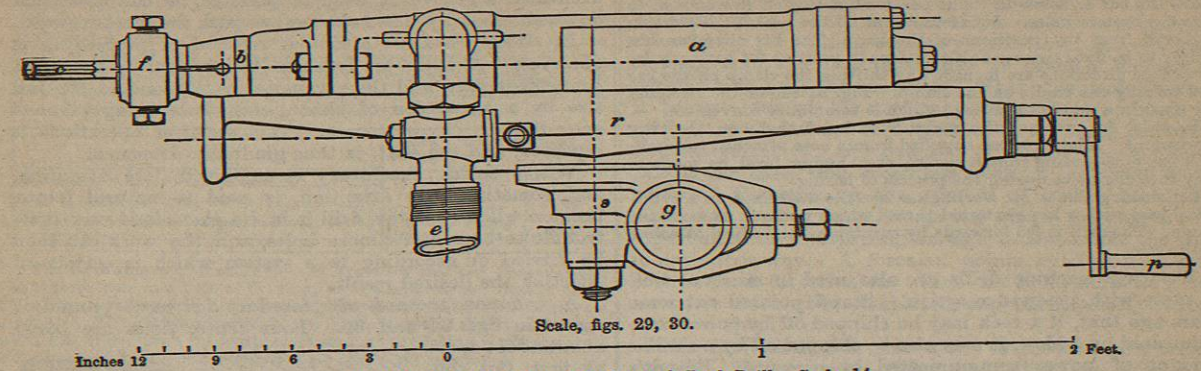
Side Elevation of Darlington's Rock-Drill.—Scale $\frac{1}{4}$ in.
